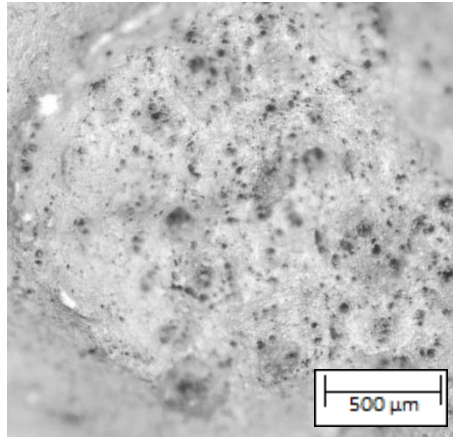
Stereoscopic image of the fracture surface of the reduced section hot round tensile test specimen of sample 3 (No heat treatment prior to welding and a 672h PWHT at 635°C). RA = 77%
